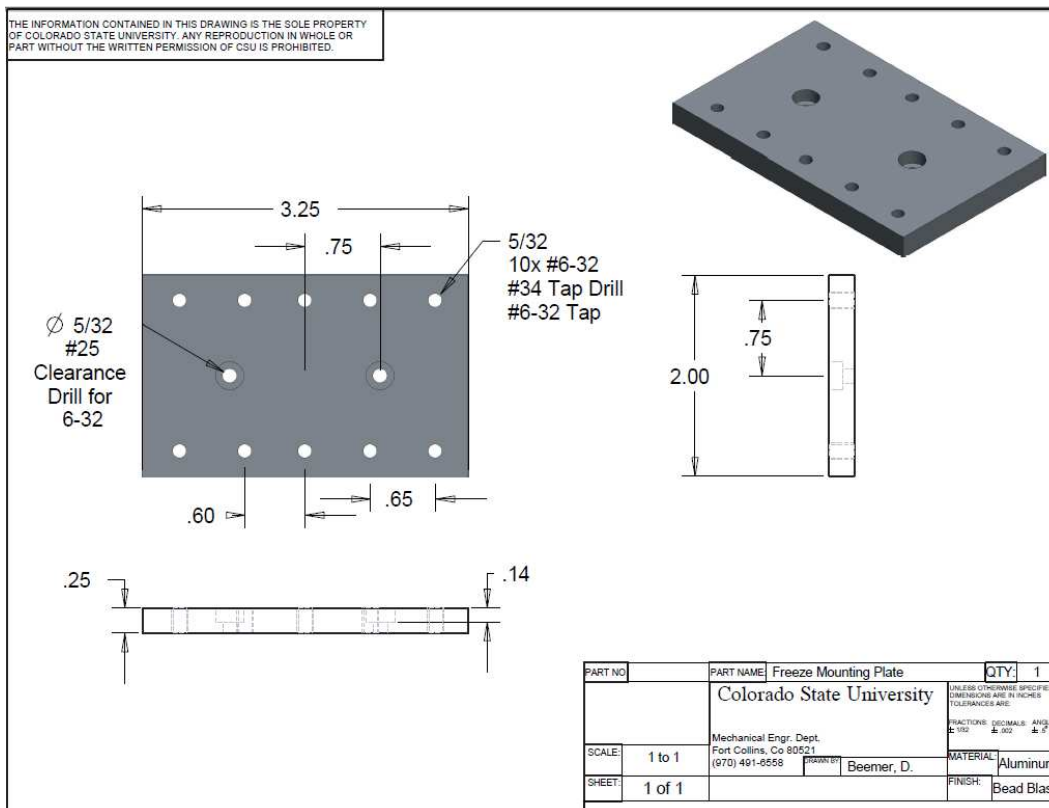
Peltier freeze mounting plate manufacturing drawing.
